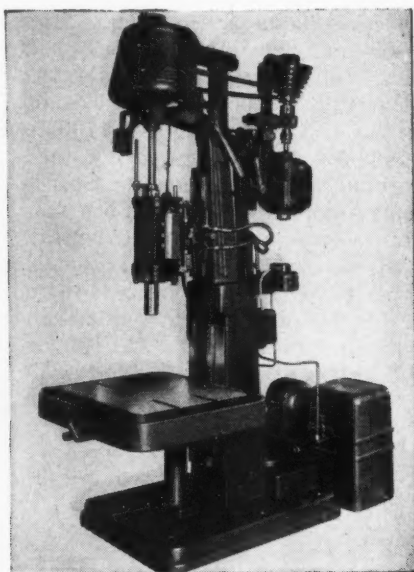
Canedy-Otto Drill Press Equipped with New Hydraulic Power Feed
